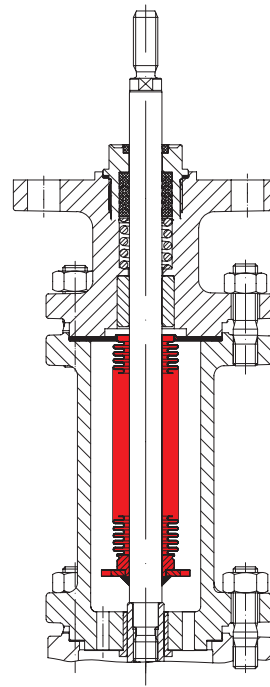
G; Nominal diameter DN100; Nominal pressure PN40; Body material 1.0619+N; Parabolic plug; Kvs 160; GLP; Stem sealing PTFE-V-ring unit; Actuator DP 33; Spring closes; Spring range 1,4-2,9 bar.
